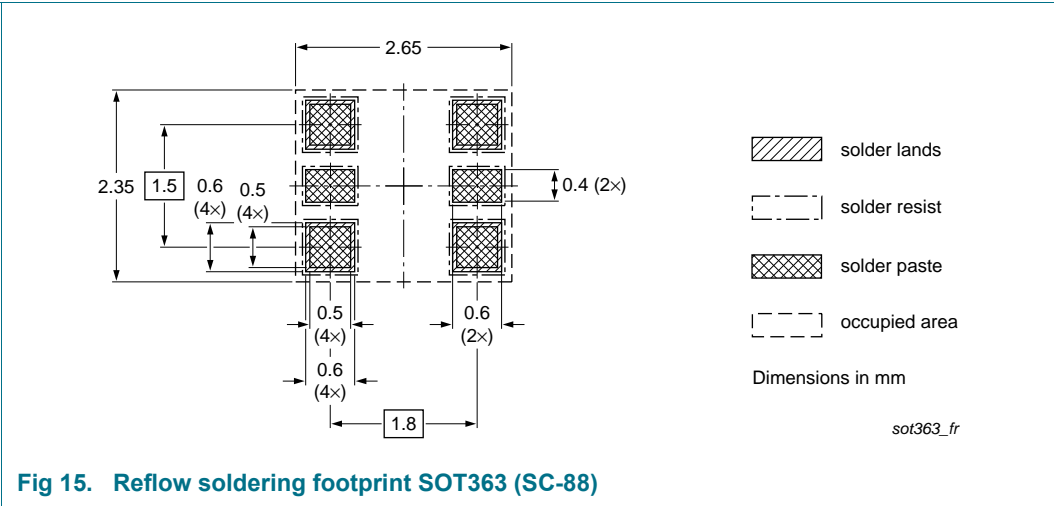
Reflow soldering footprint SOT363 (SC-88)
